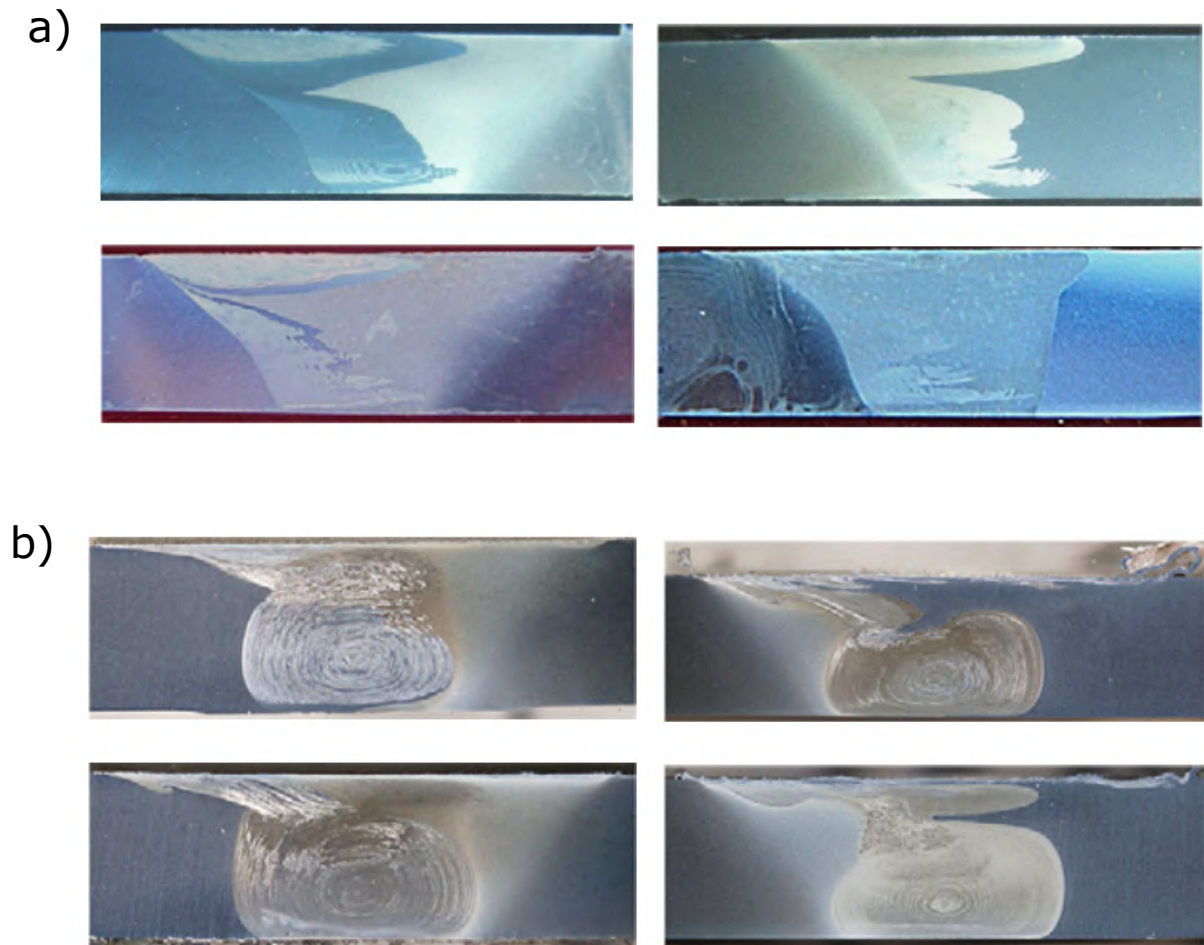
Optical macrographs of multiple AA2014/AA6061 welded joints at (a) 500 and (b) 1500 RPM. Two distinct stir zone mixing patterns are visible and depend exclusively on the rotational speed of the tool [85].
